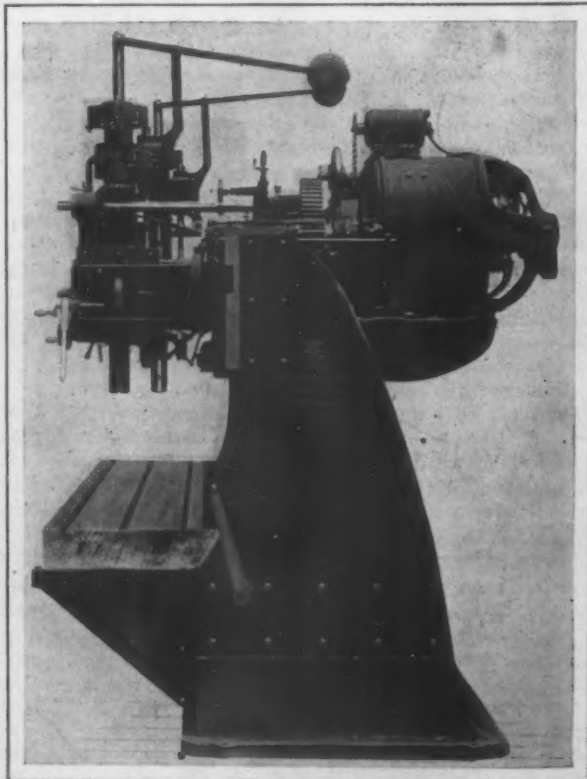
An End View of the Machine Showing the Method of Mounting the Motor
